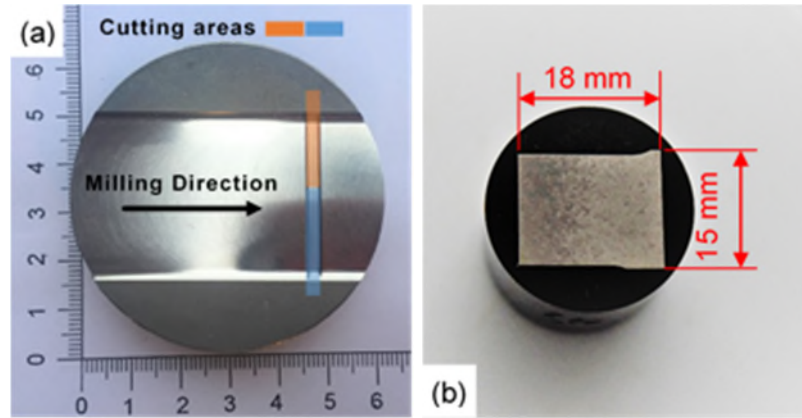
(a) Layout of the workpiece sections used for the surface metallurgy analysis, and (b) dimensions of cutted sample mounted on epoxy hot resin.
